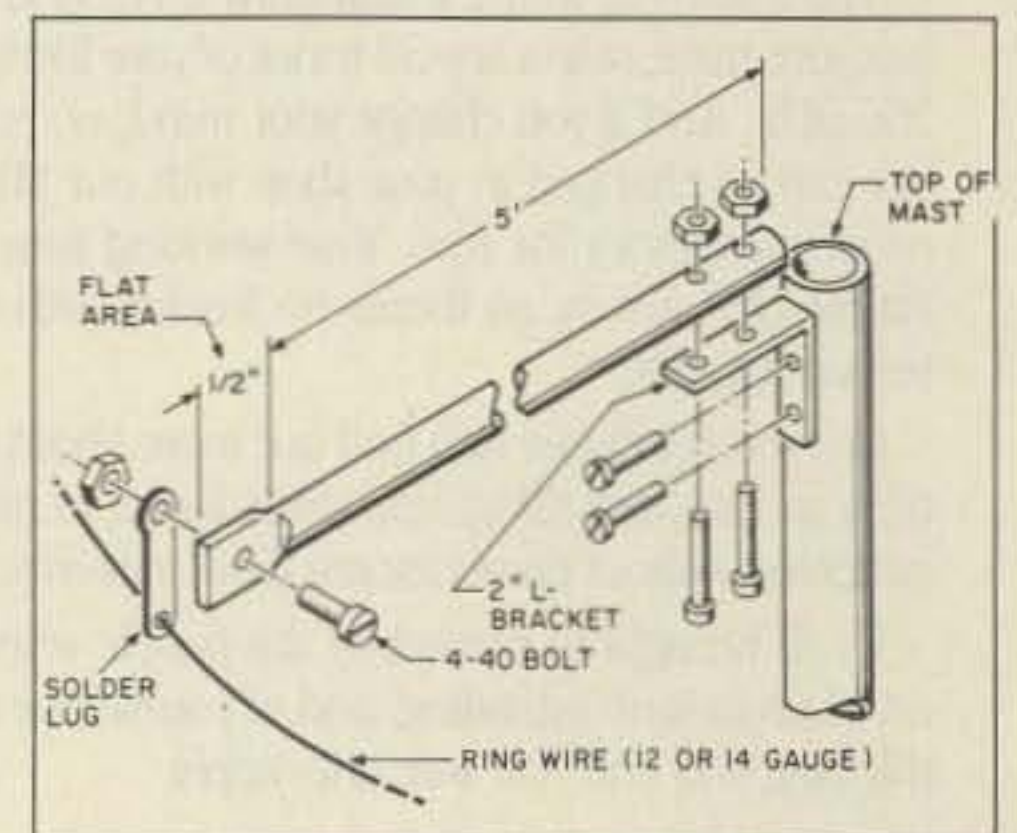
Construction details of the capacity hat tubes. A 2" steel L-bracket is used to attach each tube to the mast. Run a wire ring through the far ends of the tubes to form a large circle (solder the wire ring at the end of each tube).
